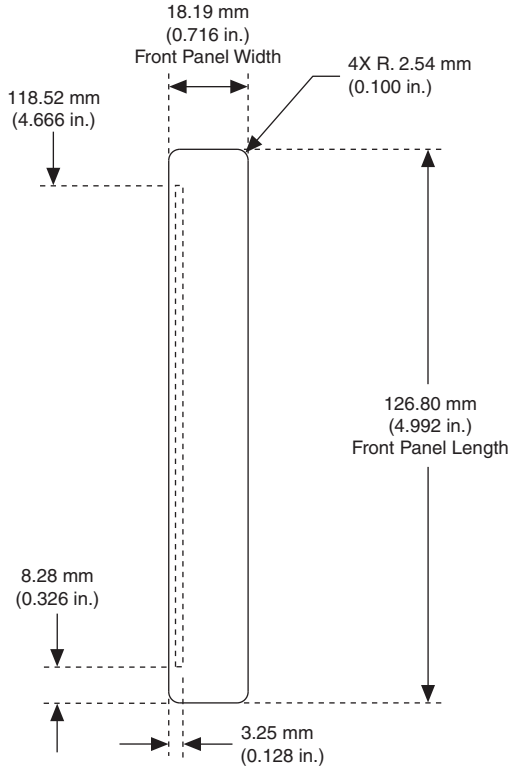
FlexRIO Adapter Module Enclosure Dimensions
